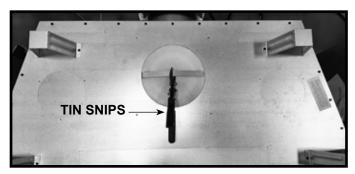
Cut Seal Cap Strap Using a Tin Snips and Bend the Pieces to 90 Degrees and Remove Seal Cap
